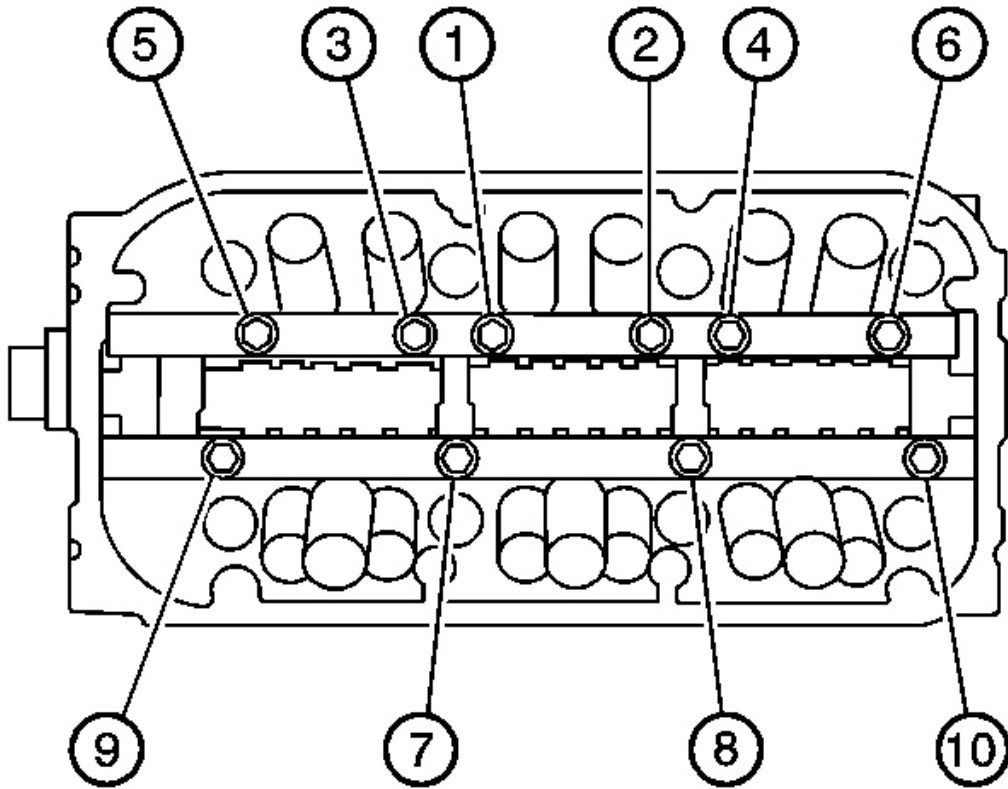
View Of Cylinder Head Rocker Shaft Bolts
